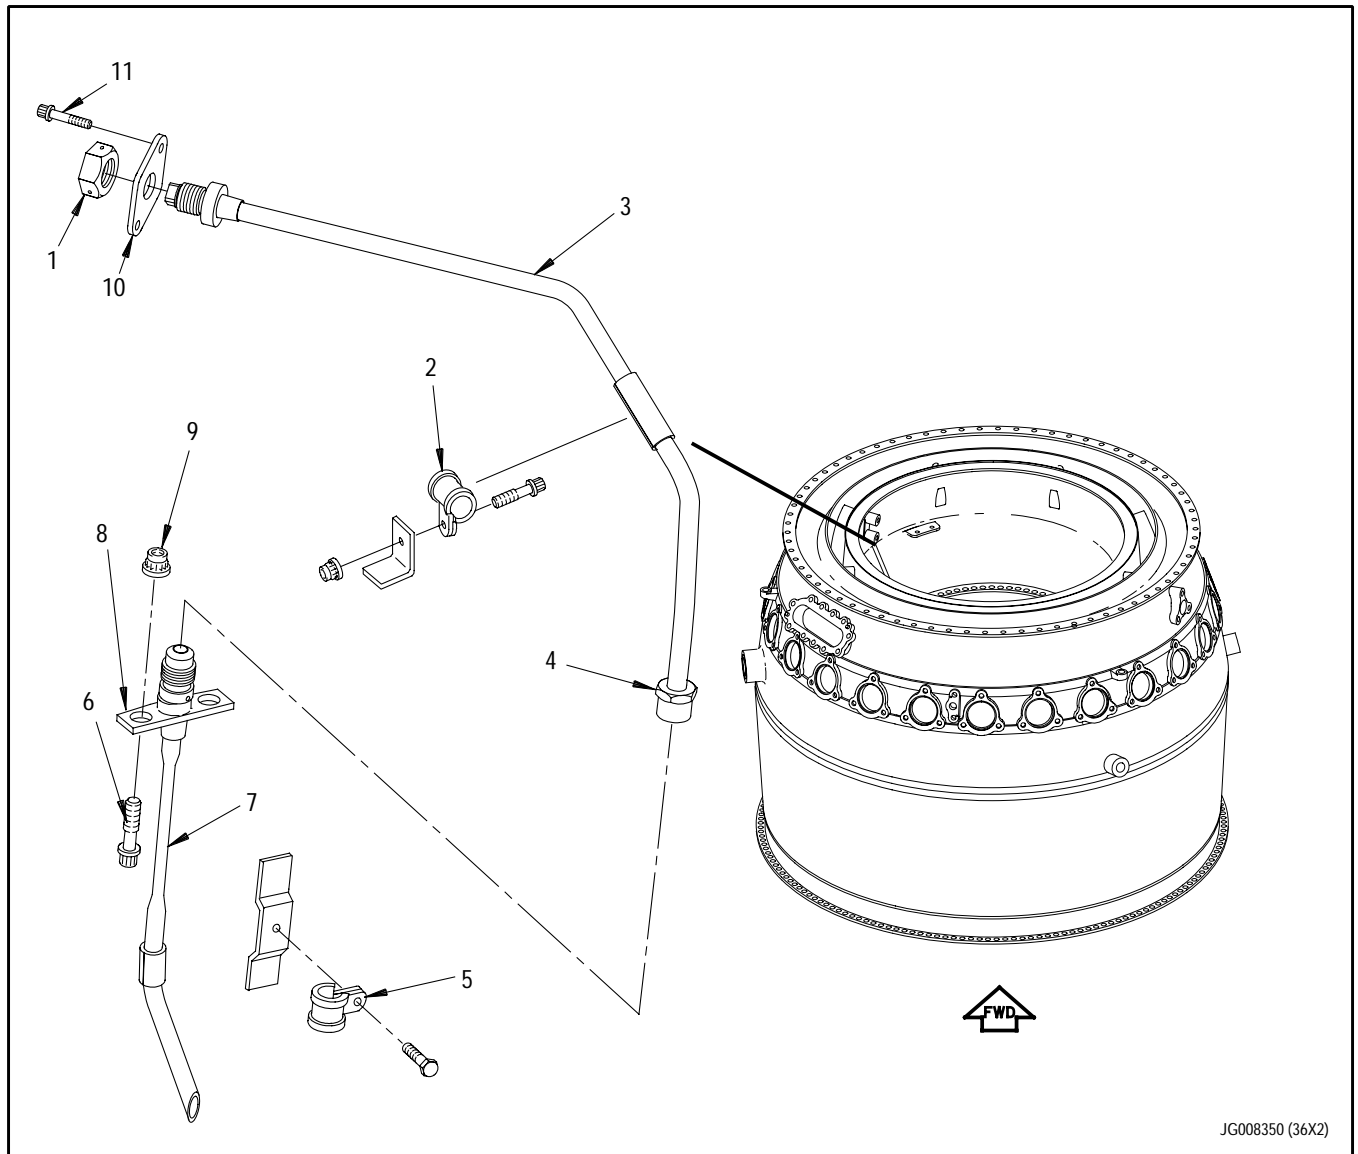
No. 4 Bearing Seal Air Supply Tube - Removal
